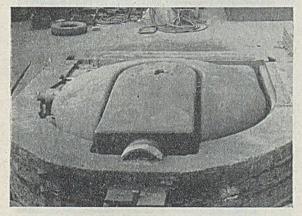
Mould partly Cored-up, showing the position of Vapour-outlet Corc.
